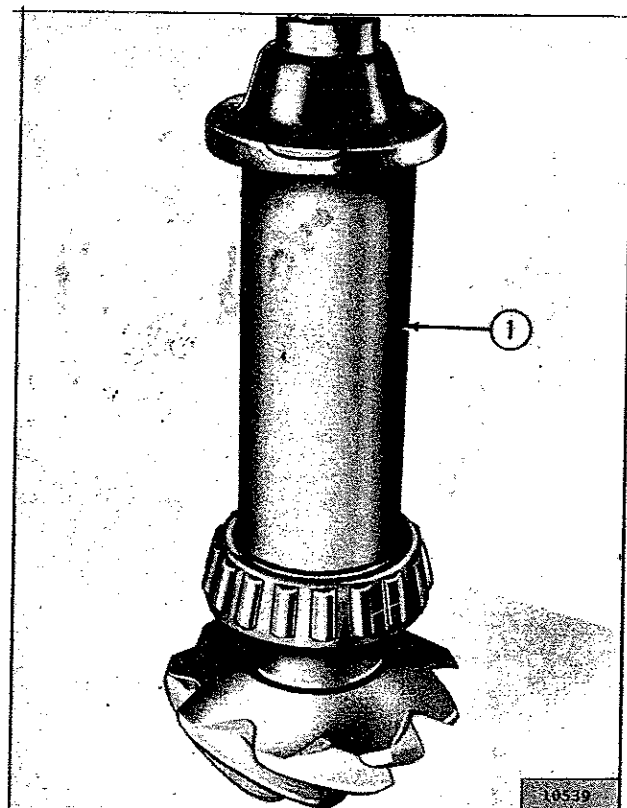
PINION BEARING INSTALLING SLEEVE
